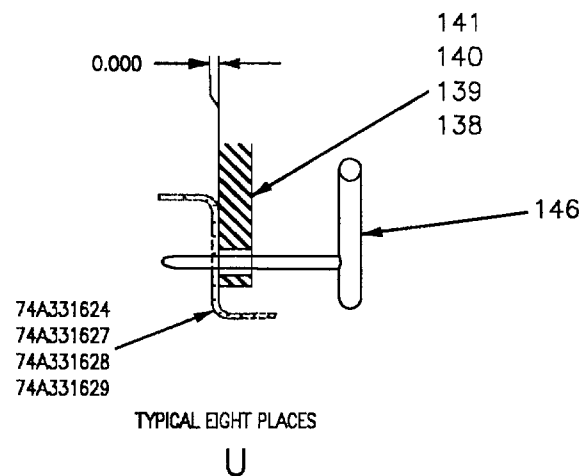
Installation of Door Into Maintenance Fixture (Sheet 8)
